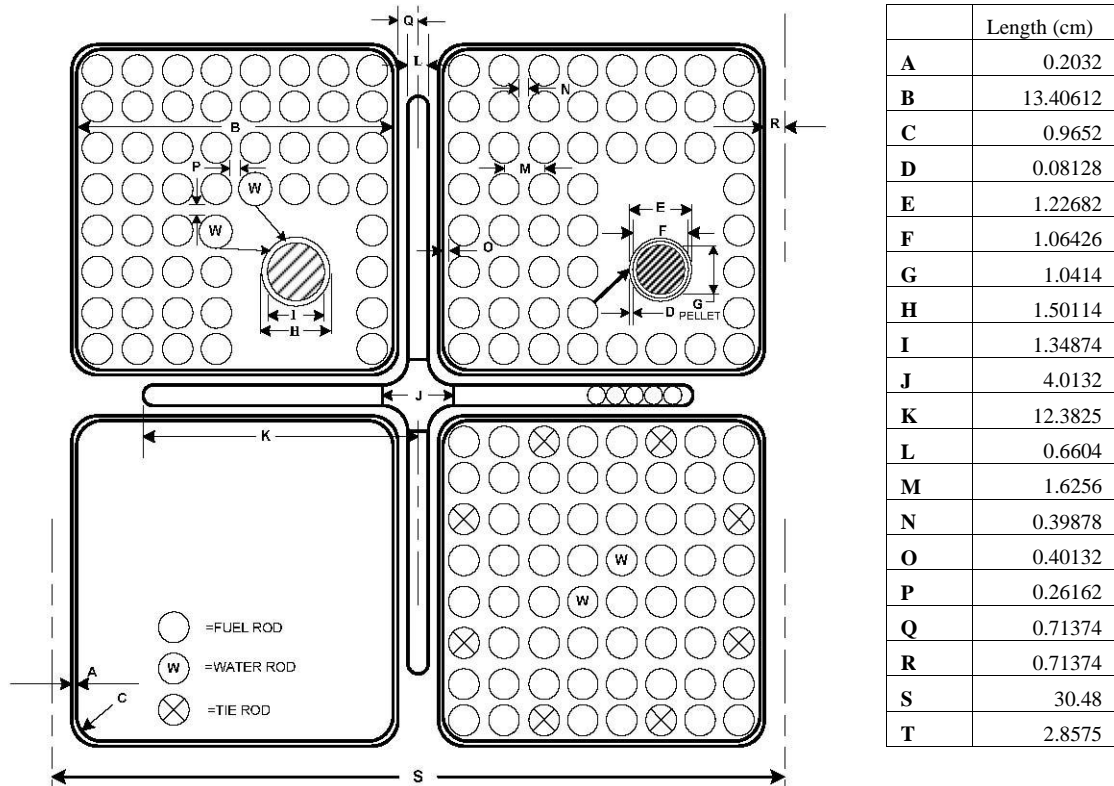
Dimensions for 8 × 8 BWR fuel assembly.
